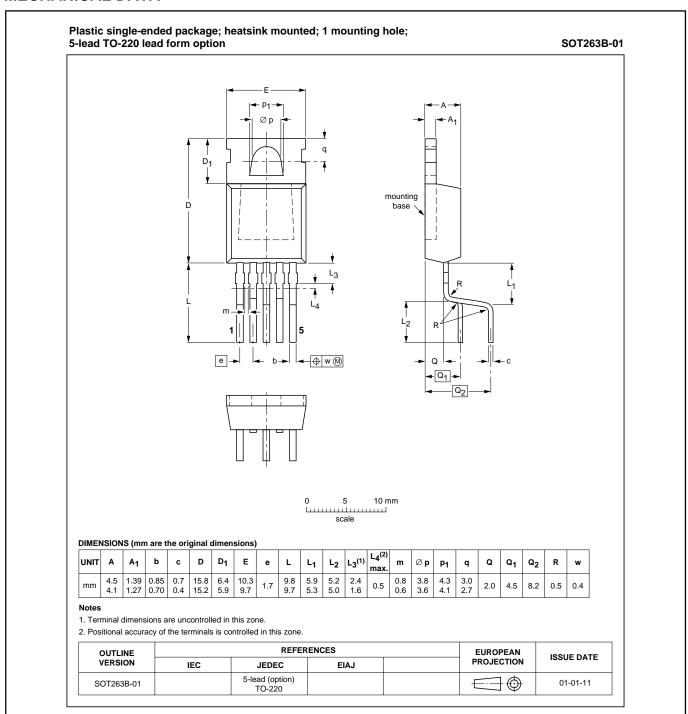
SOT263B package¹ leadform 263B-01, pin 3 connected to mounting base.
